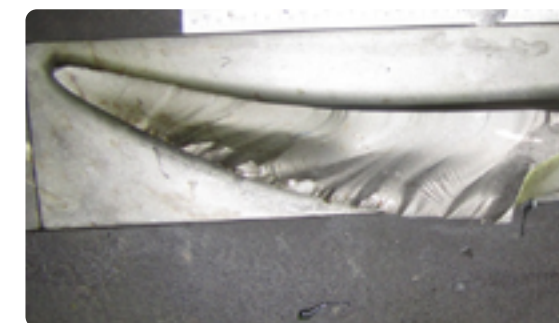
Fractured forward compressor blade with leading edge erosion at the origin
